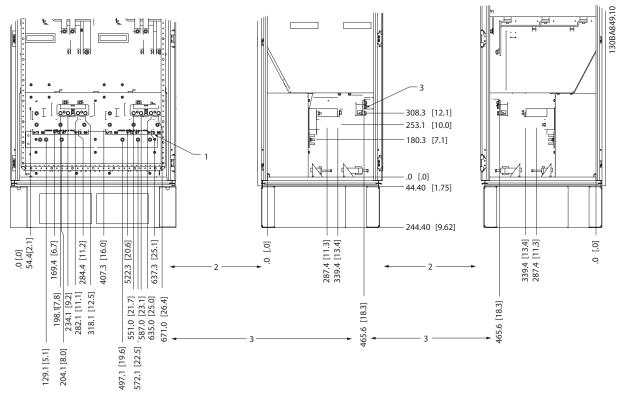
Terminal locations - Inverter Cabinet - F1 and F3 (front, left and right side view). The connector plate is 1.65 in [42 mm] below .0 level.
